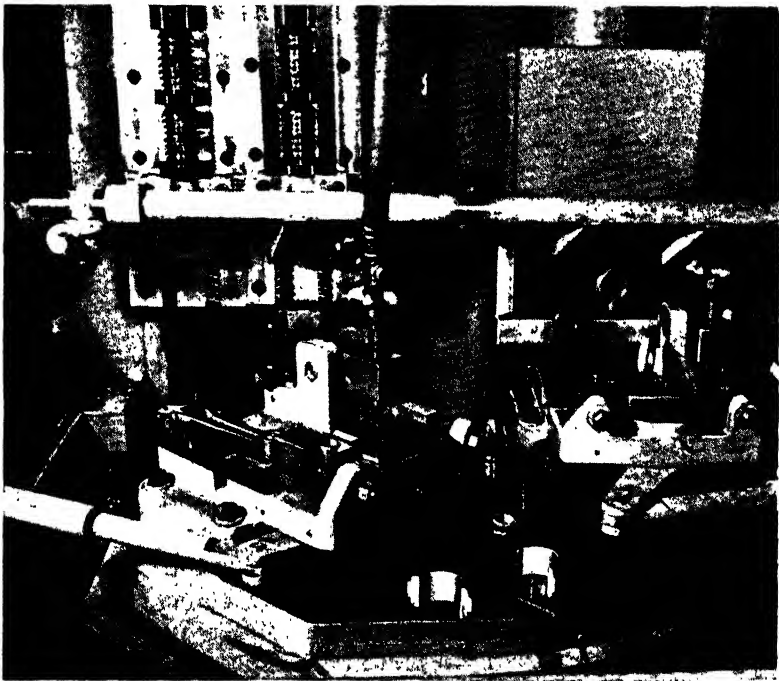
Connecting-rods and Caps are Broached on the Contact Faces, in the Crankpin Bearing, and on the Sides of the Bolt Lugs
